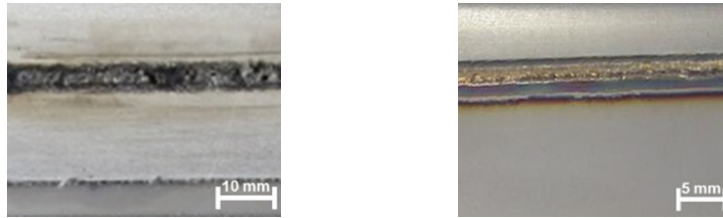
Face of weld of a dissimilar lap weld of AA6016-T4 and 1.4301 [left] and of a dissimilar fillet weld of AA6016-T4 and 1.4301 [right].
